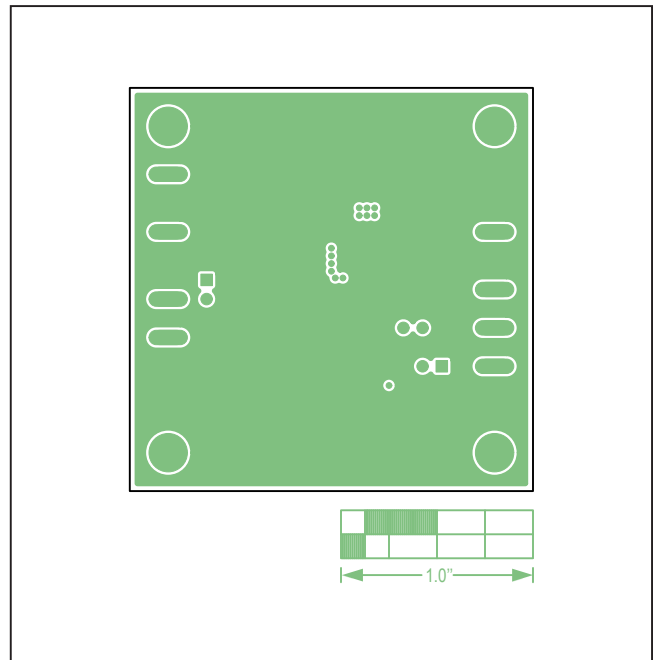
MAX17544 5V Output EV Kit PCB Layout—Inner Layer 2
